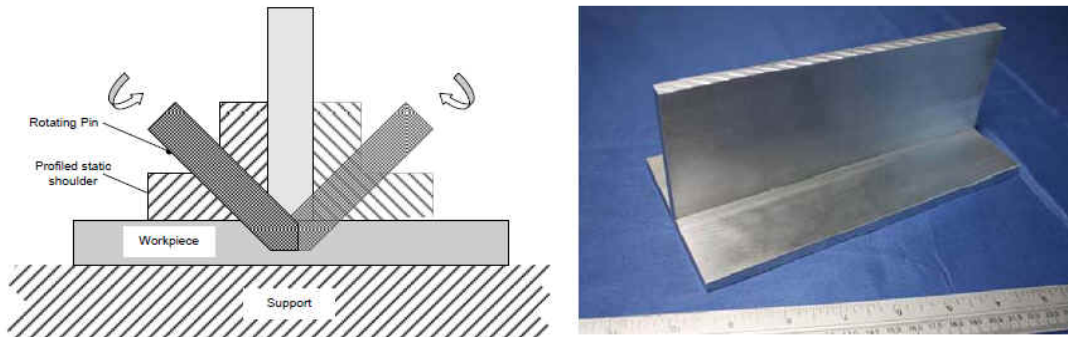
Two Corner Welds to create a Tee. Figure 4.2.3.2-2. Corner Welded Tee.
